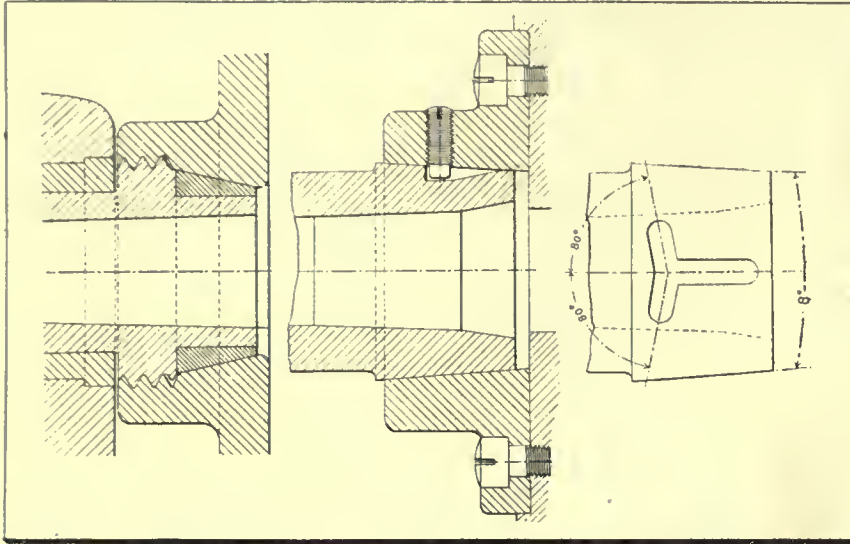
SPINDLE NOSE WITH TAPER AND THREAD ADJACENT TO BEARING.
